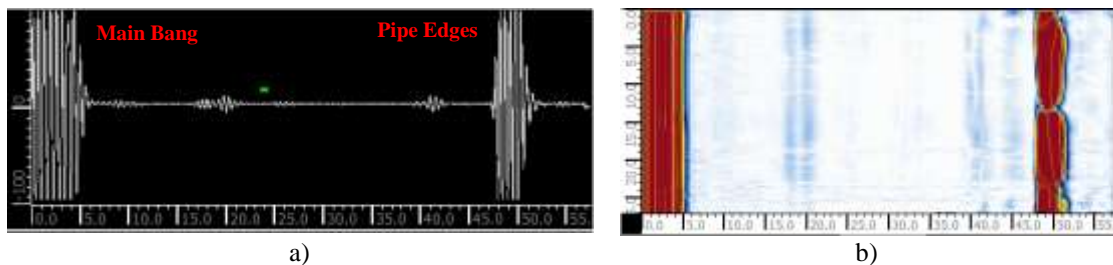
Pipe inspection exposed to air before machining the defects from test point S2 a) A-Scan, b) B-Scan
